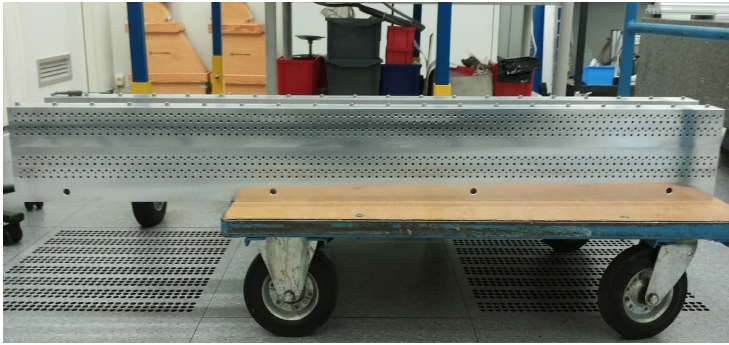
Photograph of the assembly jig for the BIS 1-8 chambers with the precision machined hole grids for the insertion of the endplugs of the drift tubes.
